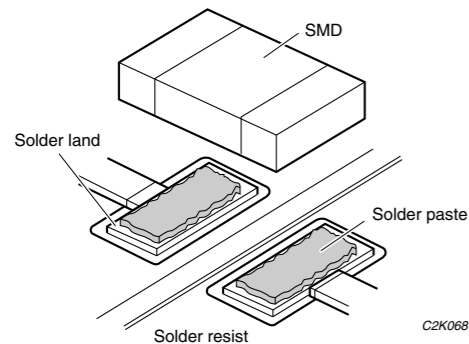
Typical SMD footprint comprising solderland, solder resist and solder paste
